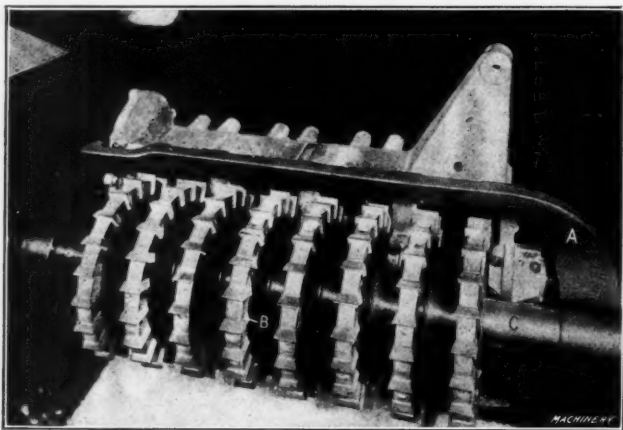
Facing the Five Bearings in the Crank-case in One Setting on a Lucas Boring, Drilling and Milling Machine
